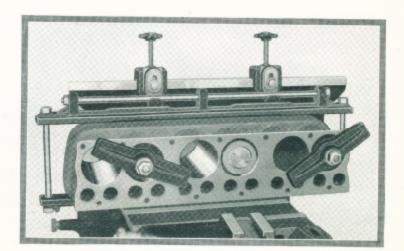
C-Rear View of Cylinder Block to Show Grinding Wheel in Action.
